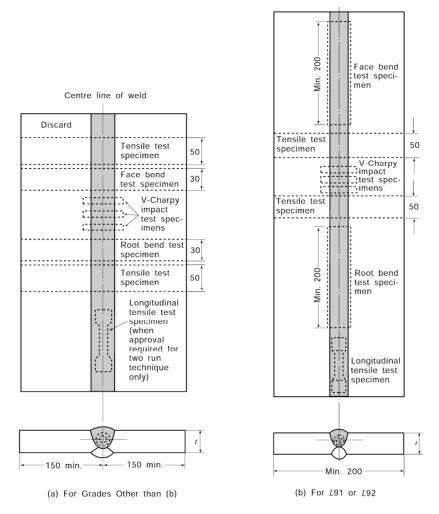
Butt Weld Test Assembly with Two-run Technique (Automatic welding, Unit: mm, t: plate thickness)
